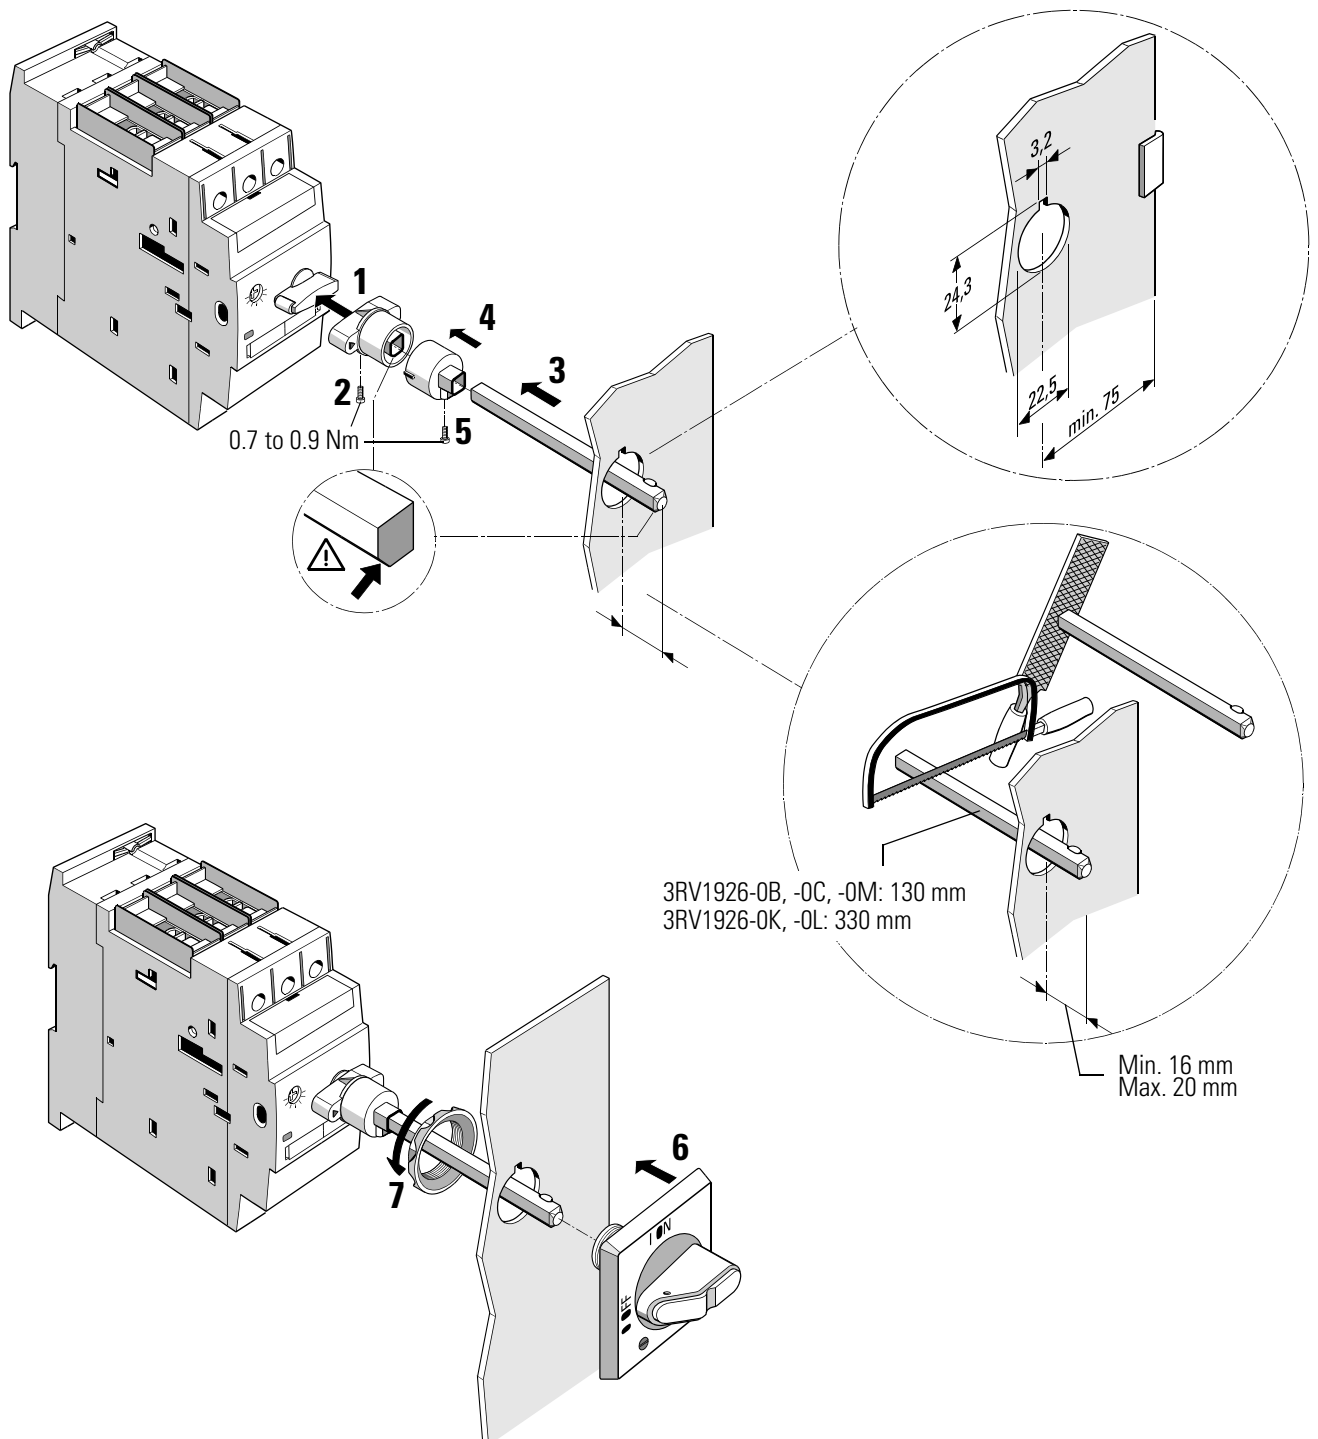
Mounting the rotary switch extension for the door (frame size S2)
